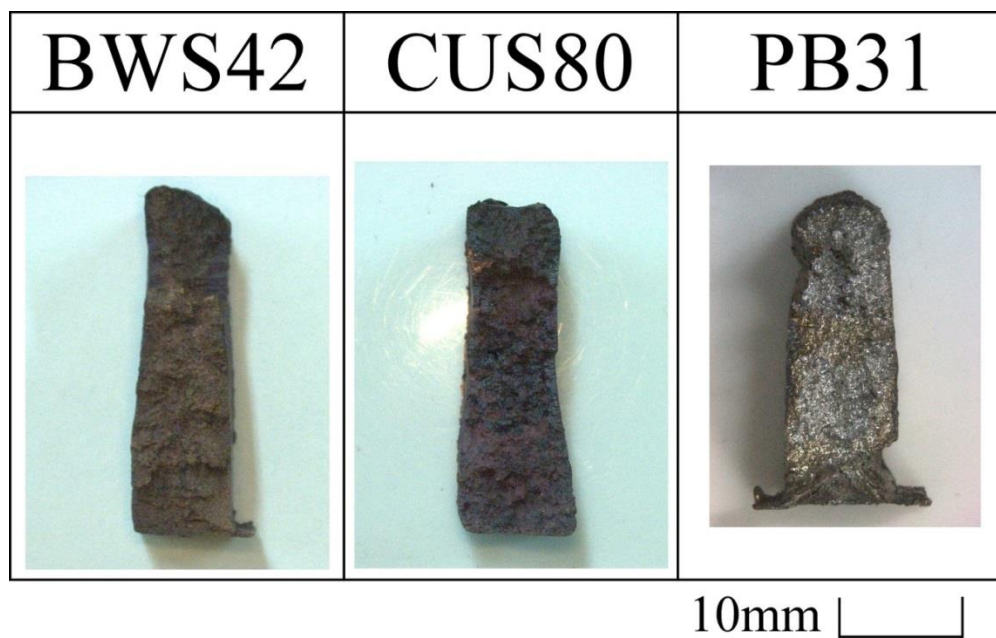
Appearances of the fracture surfaces of various monotectic Cu alloy castings in the permanent mold with 200mm of the distance between flanges.
